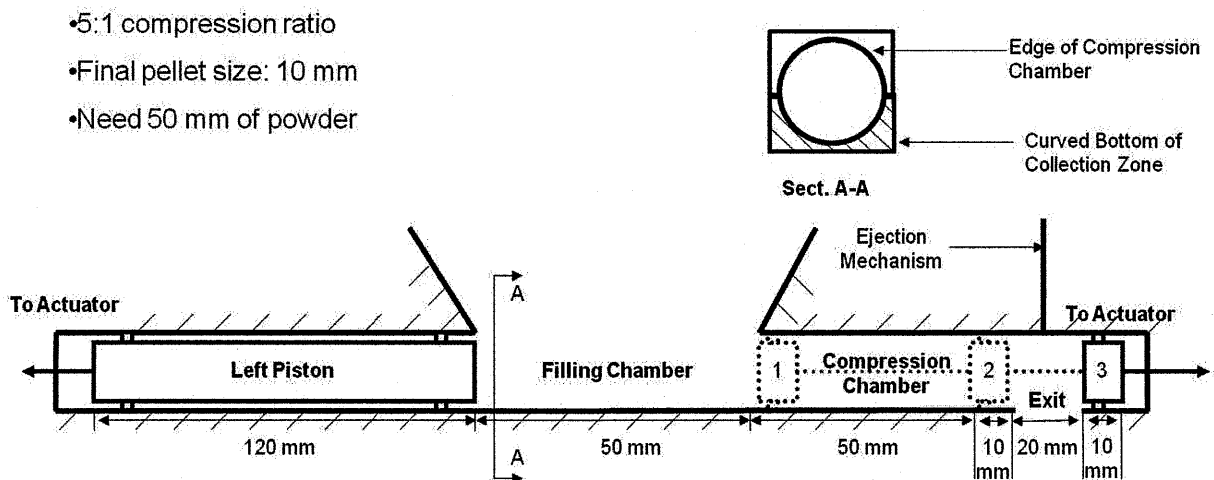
Beta Prototype – Dual Piston, Exploded Front View
